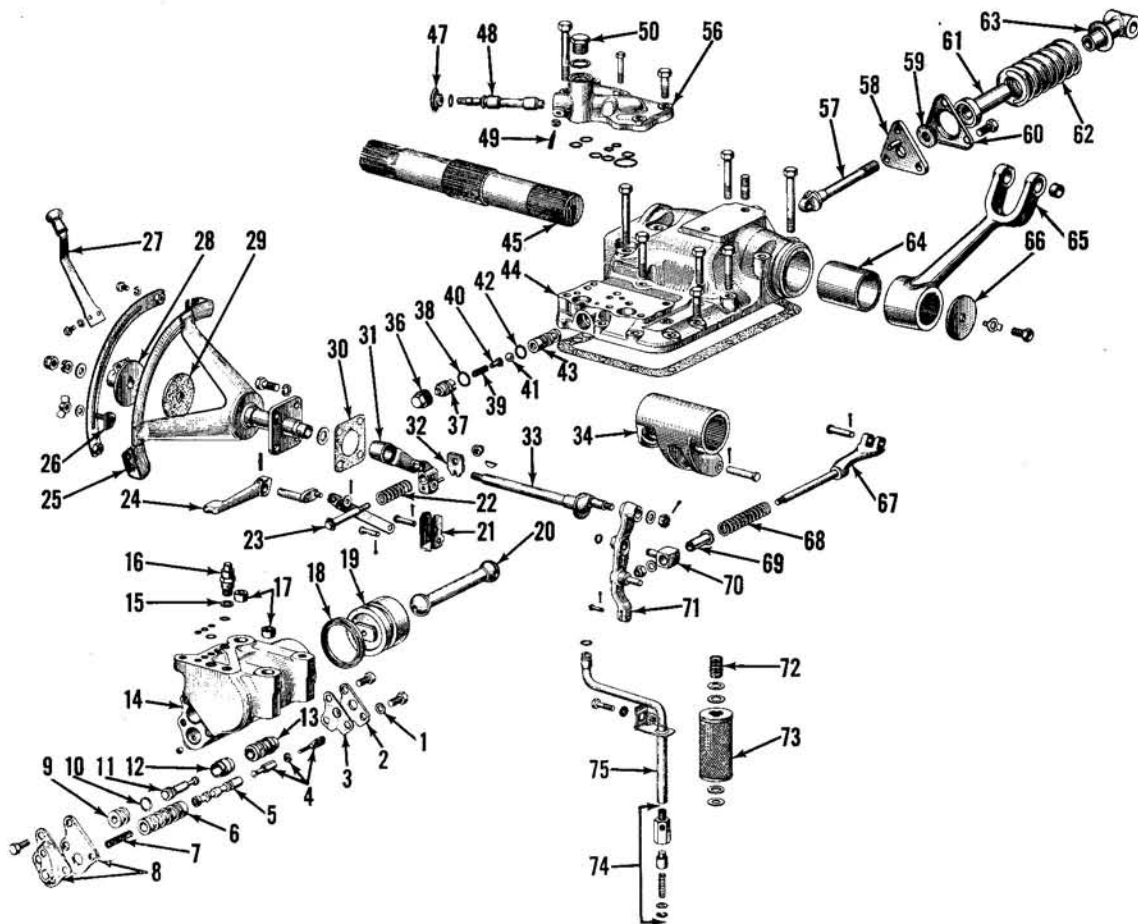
Exploded view of early Fordson Dexta hydraulic lift cover, cylinder and linkage. Accessory plate (56) can be replaced with flow control valve (54—Fig. FO564) if complete valve and linkage are used. Although component parts are different, complete lift cylinder assembly (14) is interchangeable with later type complete lift cylinder assembly (14A — Fig. FO564).
